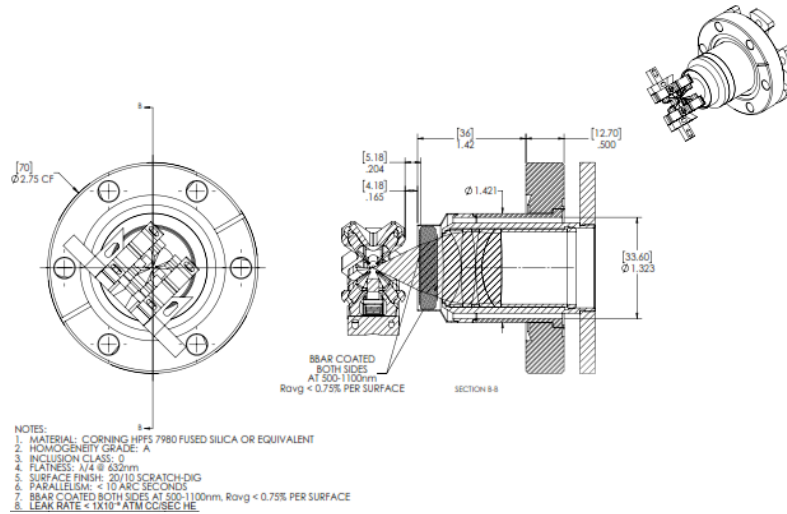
2D layout of recessed viewport. As our quantum gas microscope (QGM) has numerical aperture of 0.45, it should be located near optical cavity. Therefore recessed viewport is used and QGM is inserted. The sequence of optics represents our QGM object.
